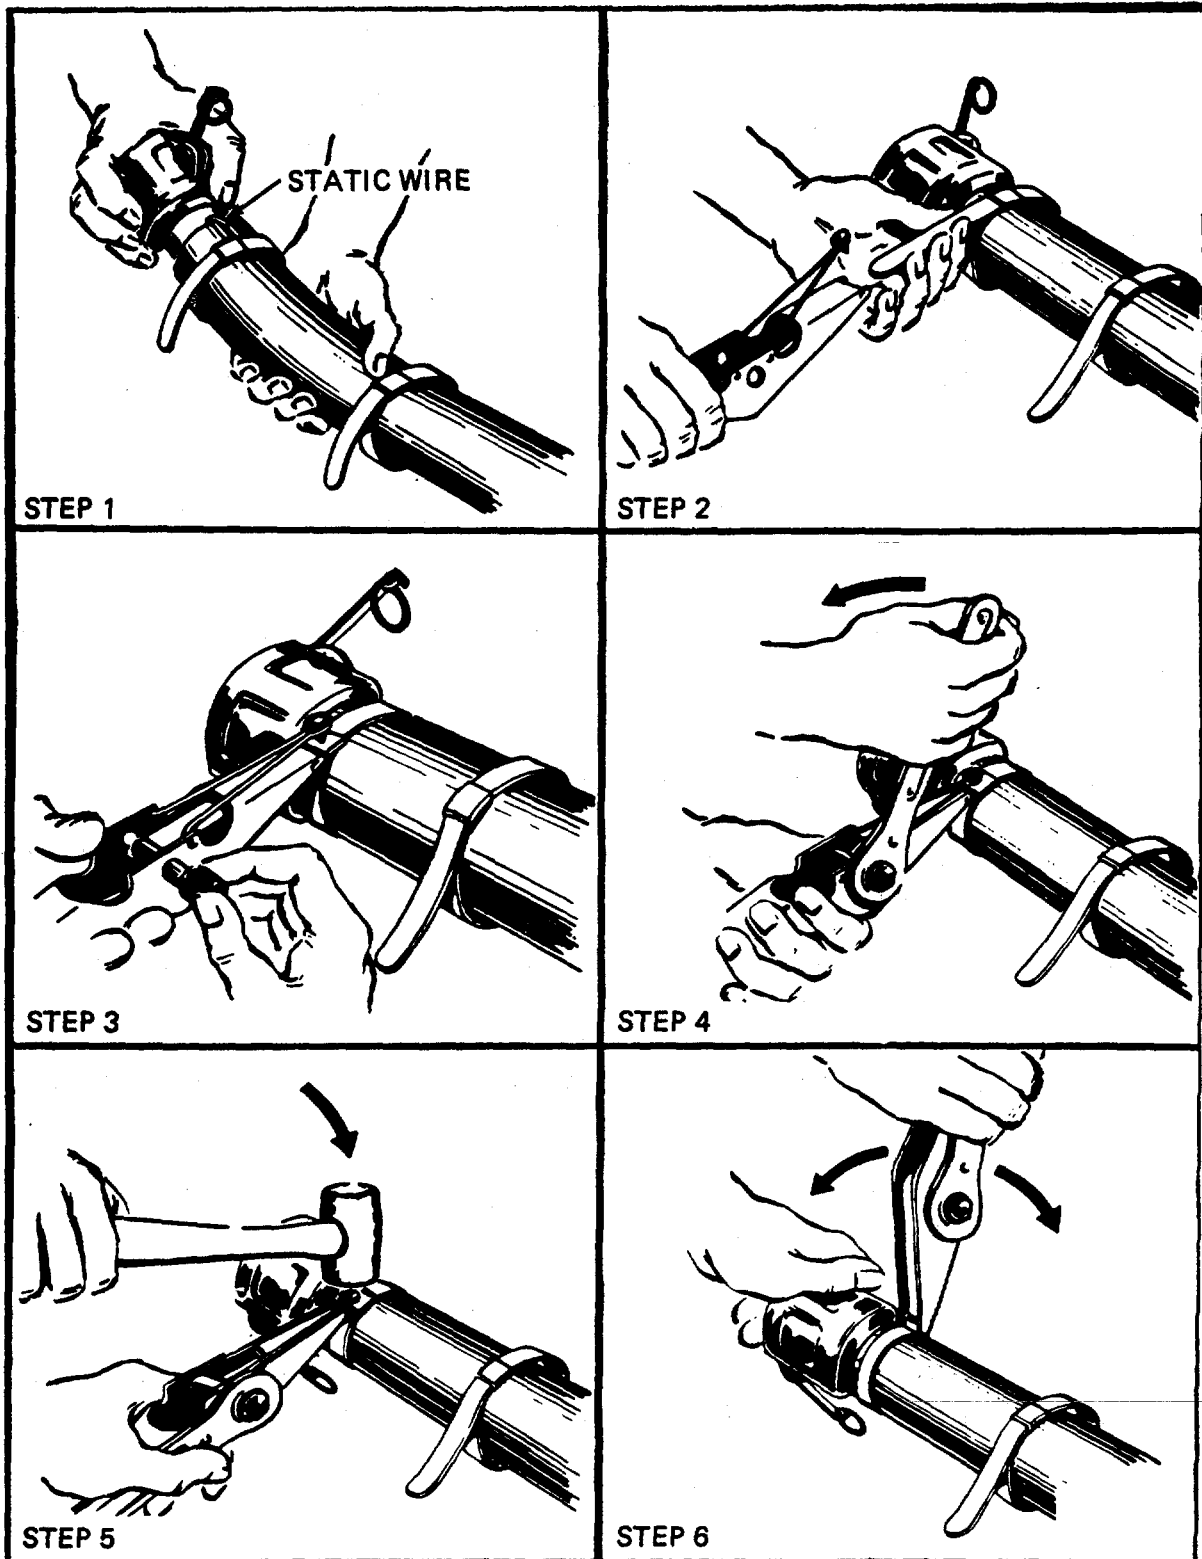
Clamp Installation Using Clamping Tool (Appendix C, Item 37).
